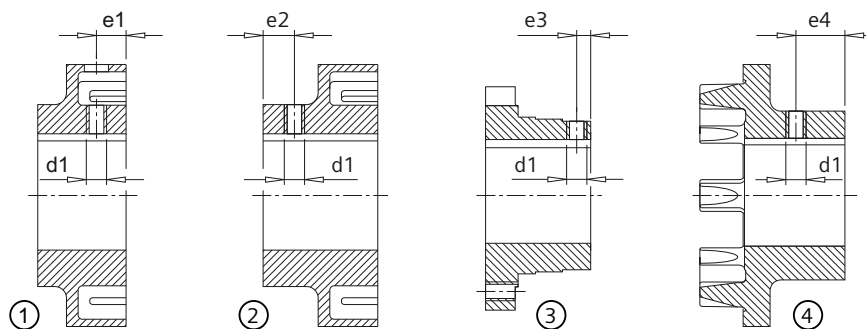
Diameter and axial position of the threaded hole in the hub
